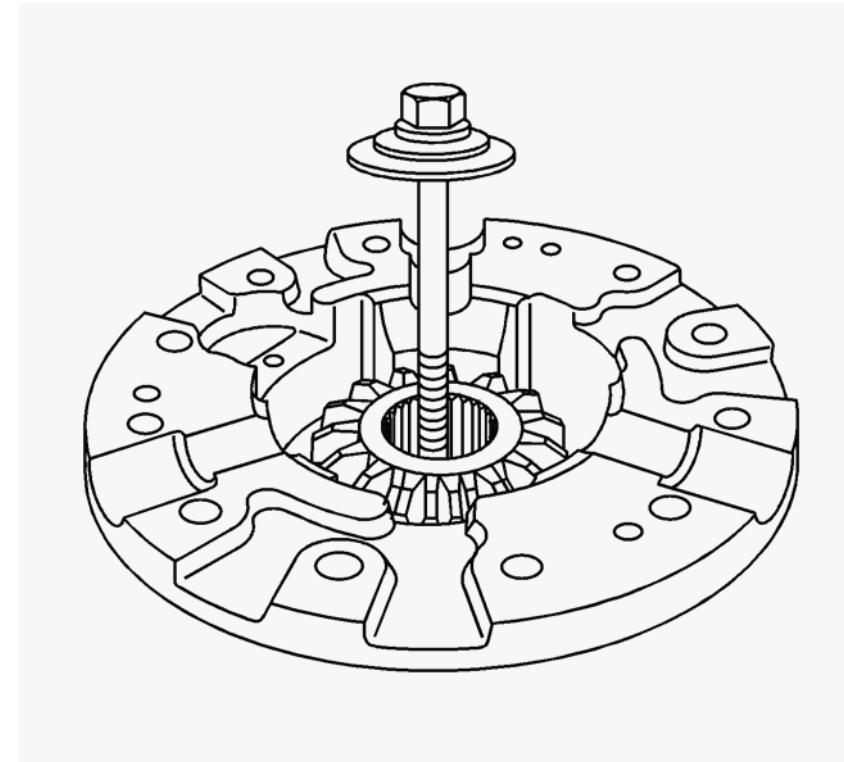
Installing Bolt And Washer Assembly Through Differential Case Half
